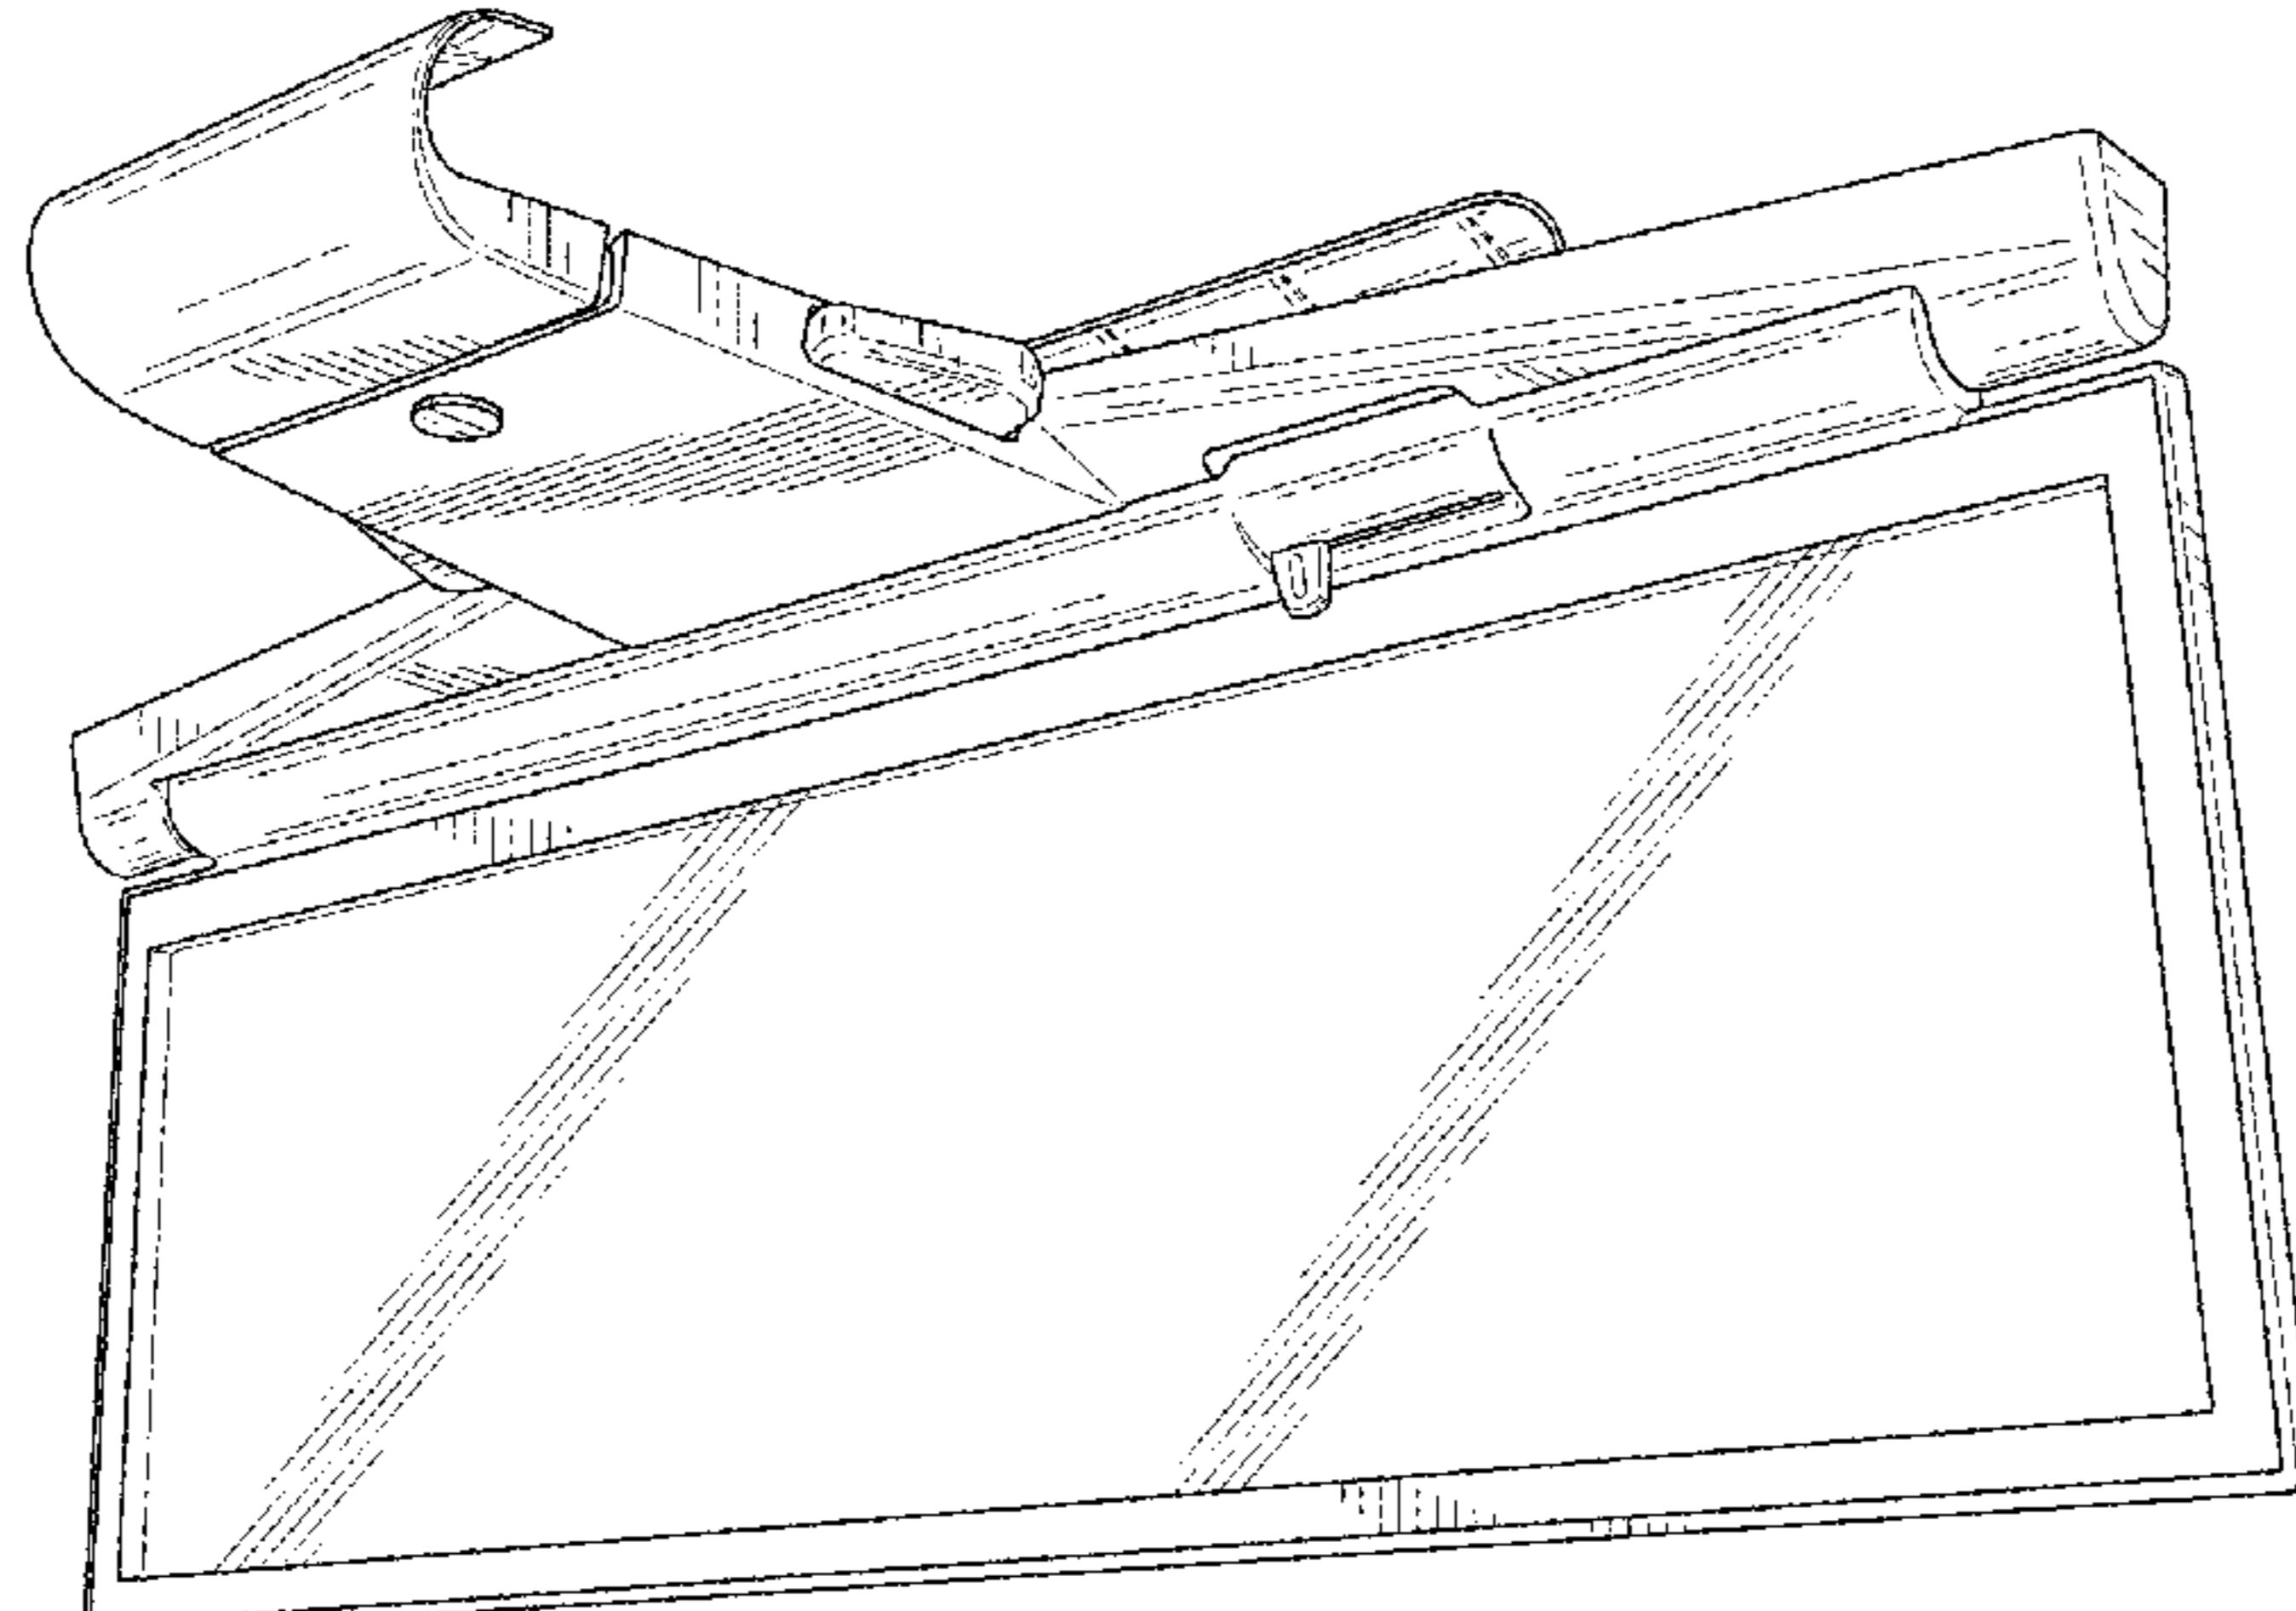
is a right view of the see through sun visor shown in FIG. 1;
